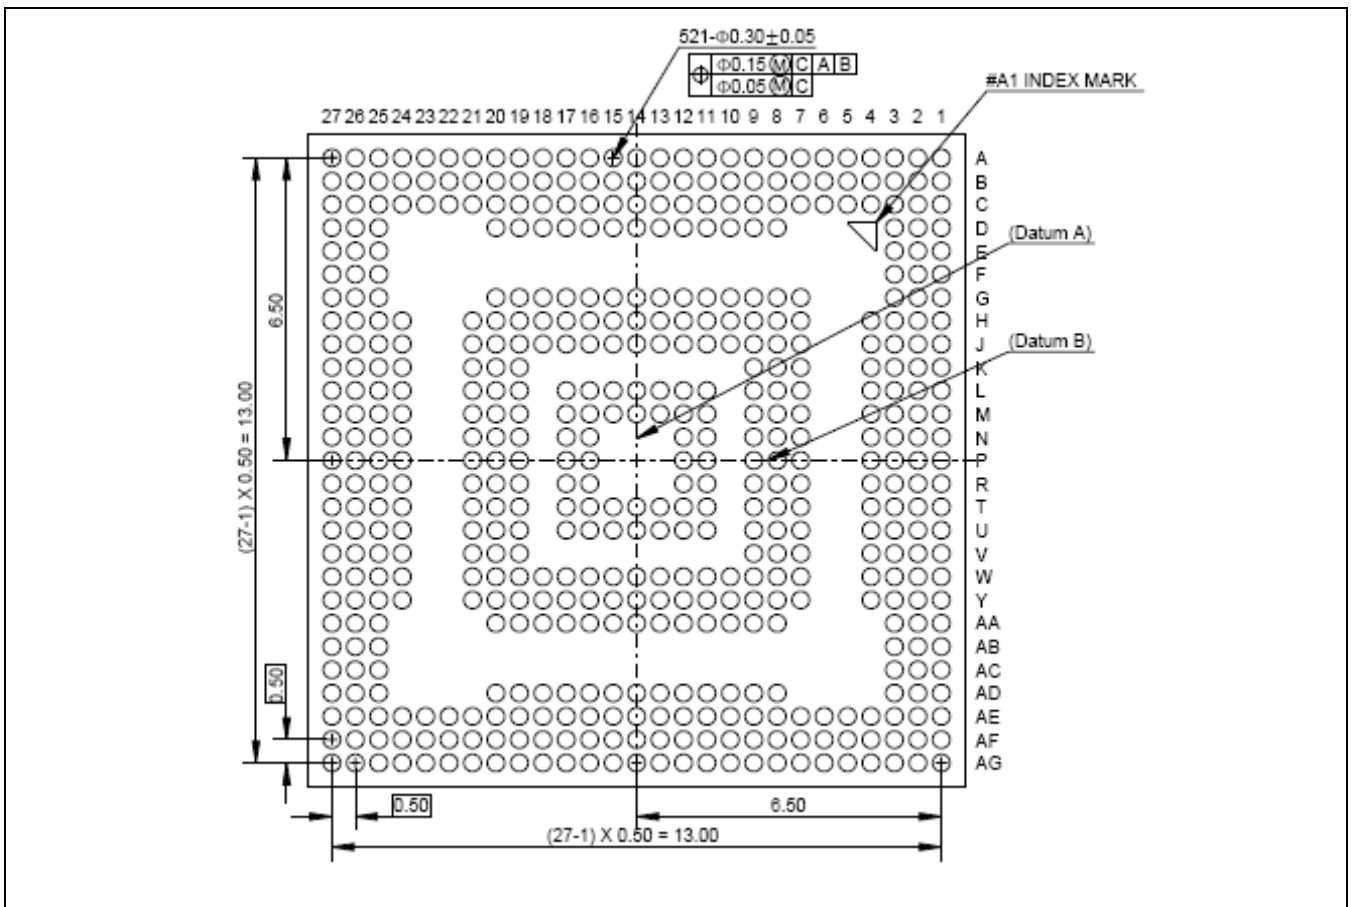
1 S5PC100 Pin Assignment (521-FCFBGA) Bottom View
